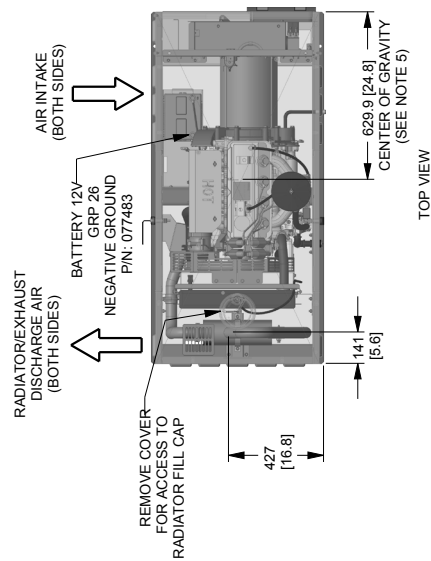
K8624-C (1 of 2) – For 22 & 27 kW
